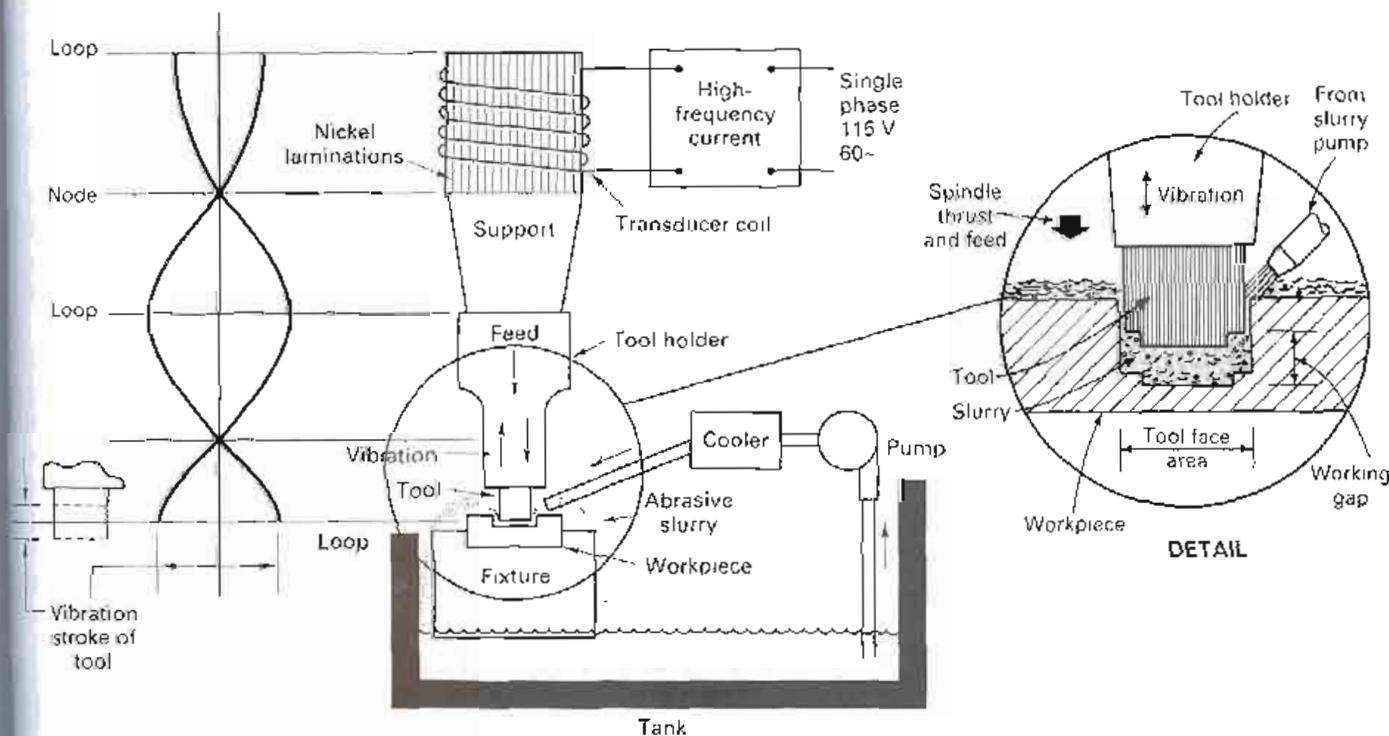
Sinking a hole in a workpiece with an ultrasonically vibrating tool driving an abrasive slurry.
